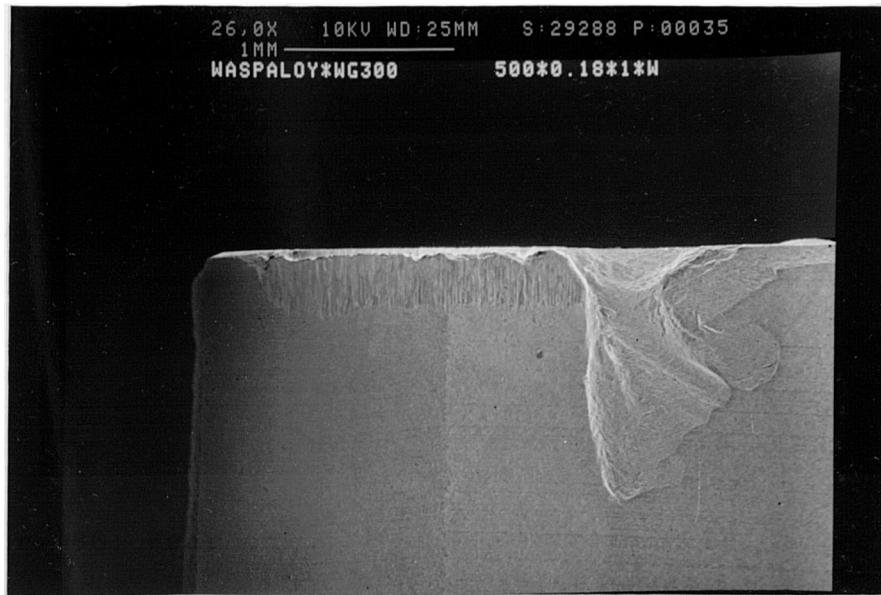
Wear on the flank face of WG-300 after machining of Waspaloy, (V=150m/min, F=0.18mm/rev, DOC=1mm, Wet)
